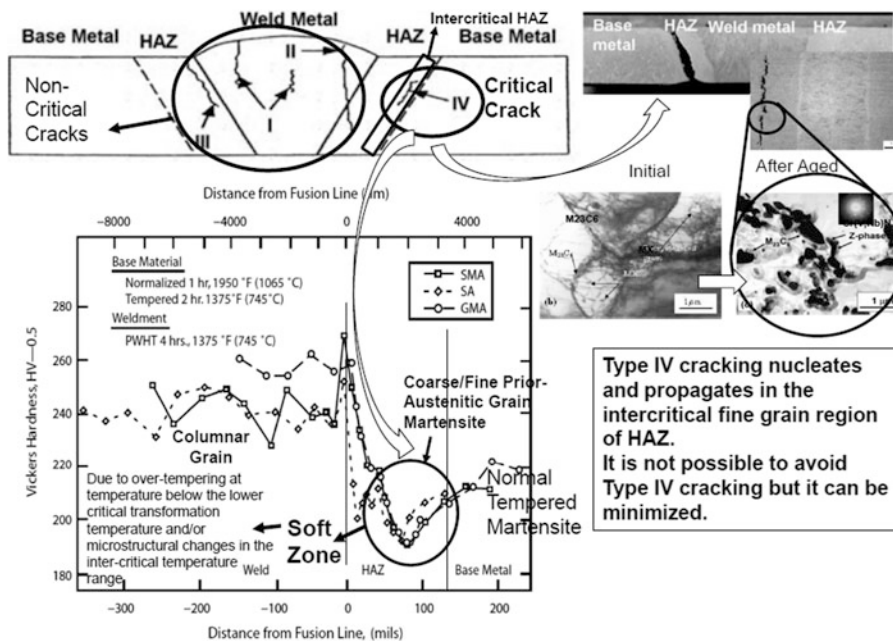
Type IV cracking at the soft zone in HAZ of 9Cr-1Mo-V steel welding
